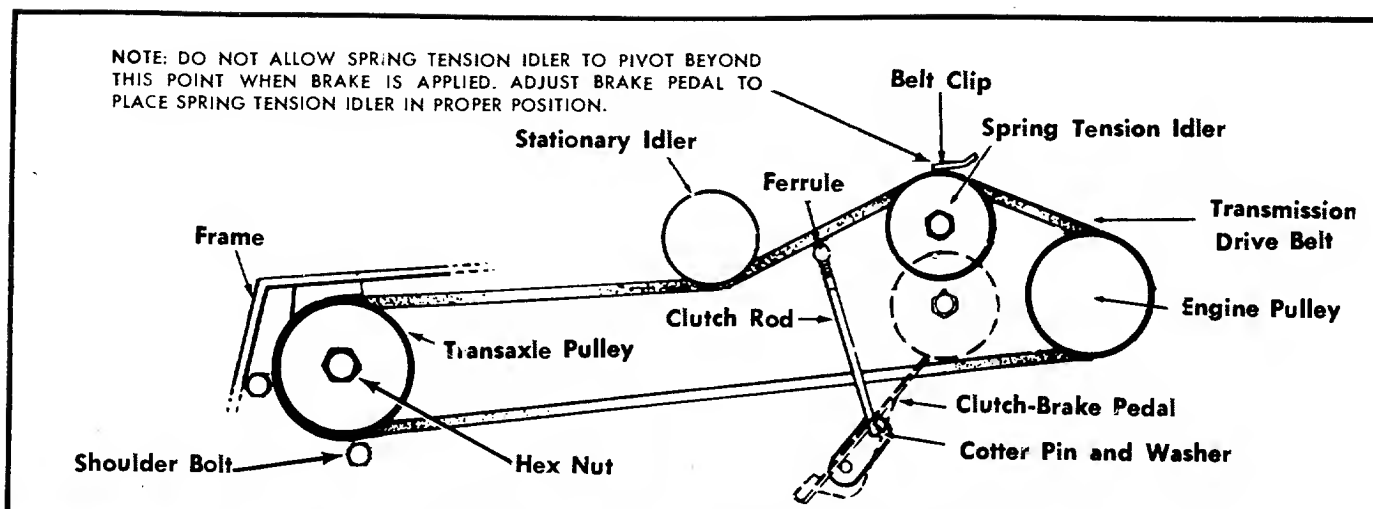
CLUTCH BRAKE PEDAL ADJUSTMENT
